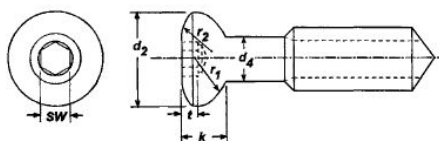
Schematic of HB Screw Dimensions (Table A5.3)
